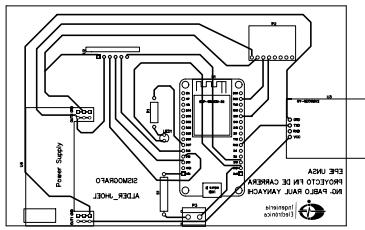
PCB to scale 60% top layer (Reverse for printing)
